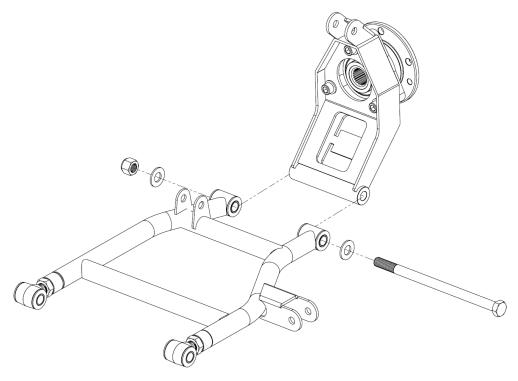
Assemble the upright to the lower arm using the 5/8 X 10-1/2" bolt and harware.
